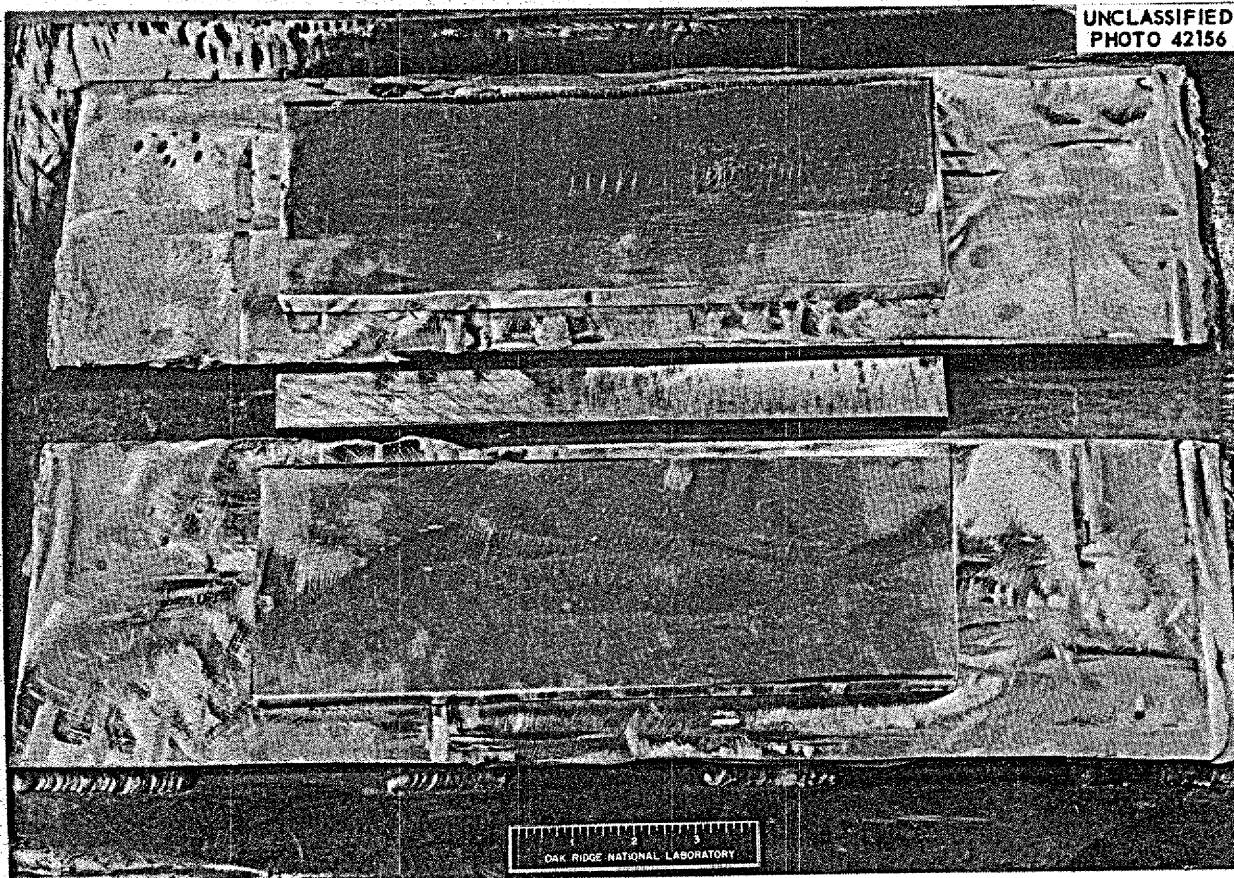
Weld Test Plate Assembly for Evaluating the Weldability of Heavy Sections Shown Prior to Welding.
